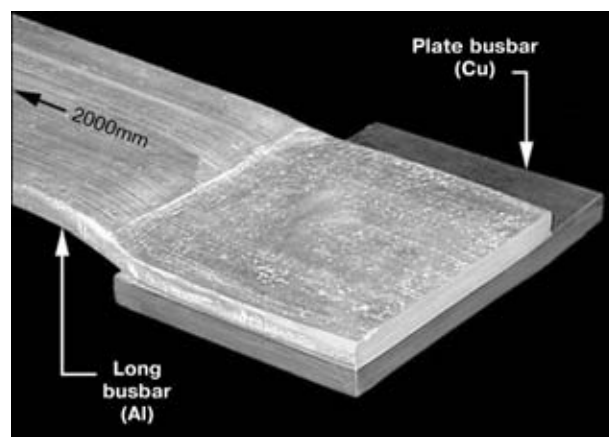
Transition welded joint between the long ($L = 2$ m) aluminium busbar and the copper plate busbar
